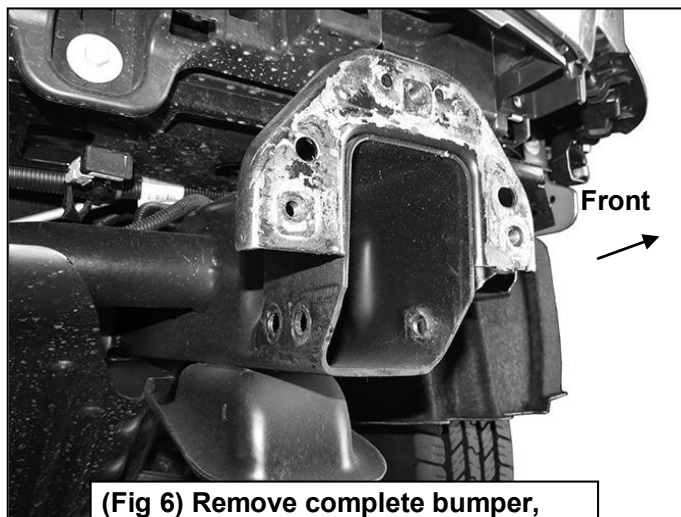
Remove complete bumper, inner bumper bracket and tow hooks
